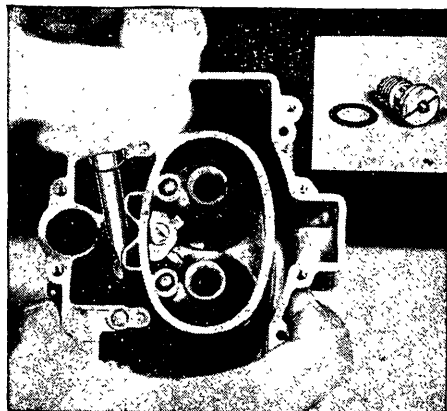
With large screw driver, remove power by-pass jet and gasket. Scrap both parts. In AA carburetors using two by-pass jets, the one with the long stem valve is for the power system, and the one with the short stem valve is for the accelerating system
